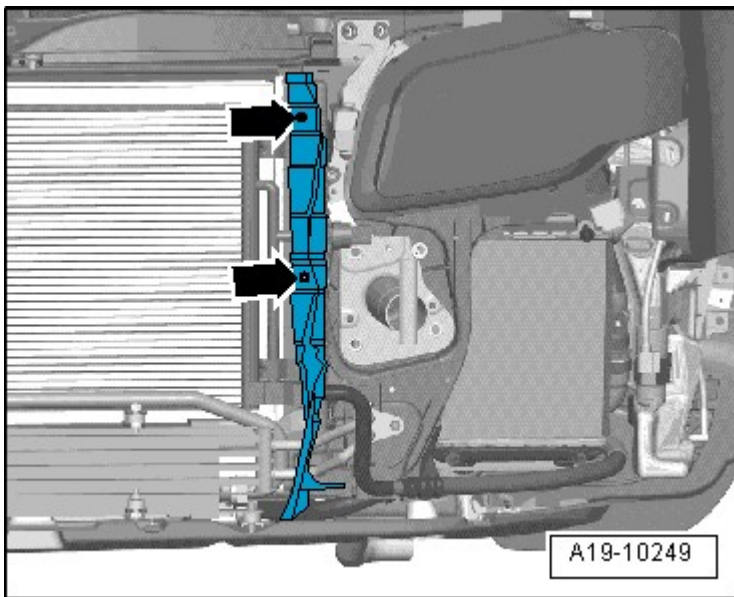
Removing Bolts On Left/Right Air Guides At Cooler
